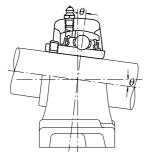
Permissible Misalignment of Ball Bearing Units
